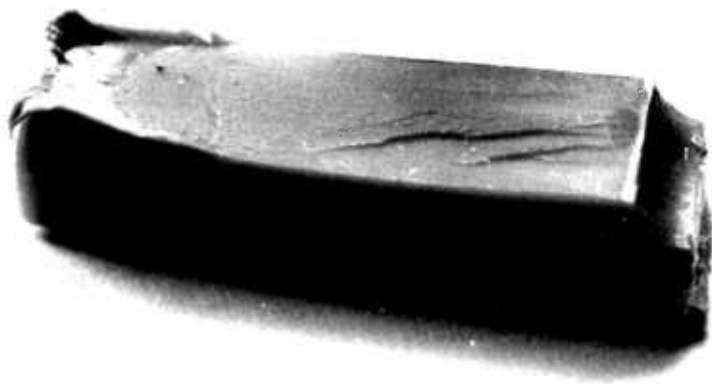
FRACTURE SURFACE - SIDE YIELDING ELIMINATED
